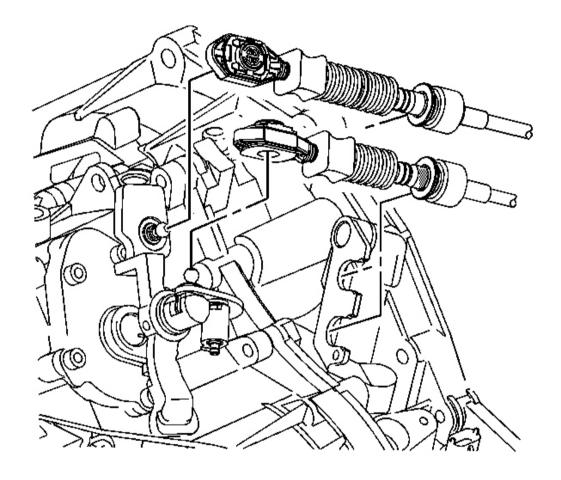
Shift Cables & Shift Cable Bracket Courtesy of GENERAL MOTORS CORP.
